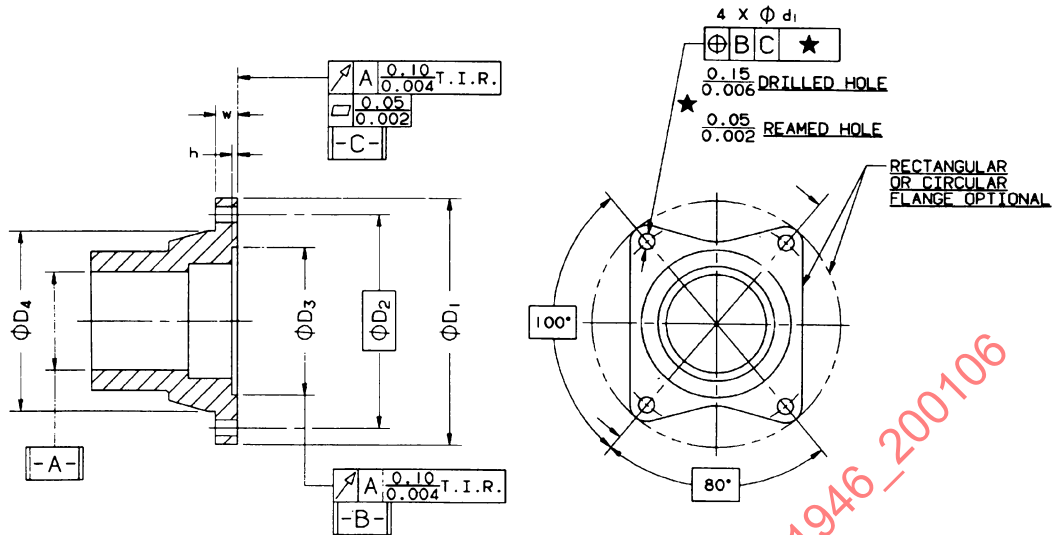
TYPE S COMPANION FLANGES—TRUE POSITION, FLATNESS AND RUNOUT TOLERANCES—mm/in
